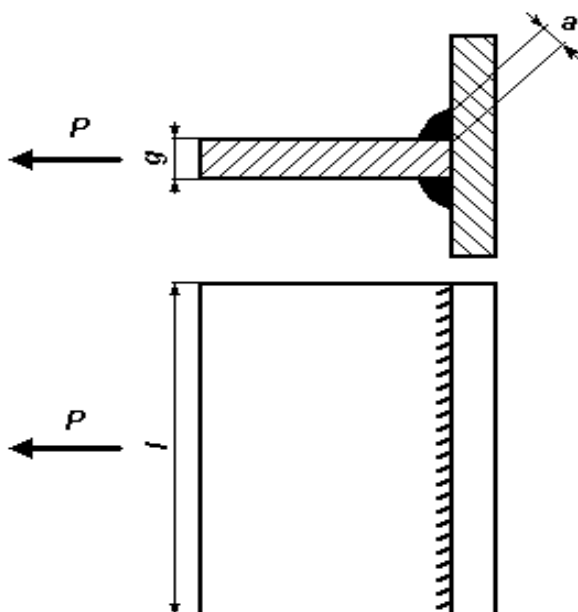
Sketch for the calculation of the weld [5]
